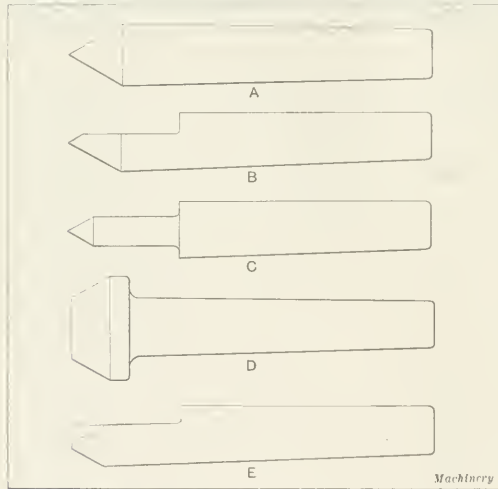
Collection of Different Shaped Centers for supporting Work in Cylindrical Grinding Machines
